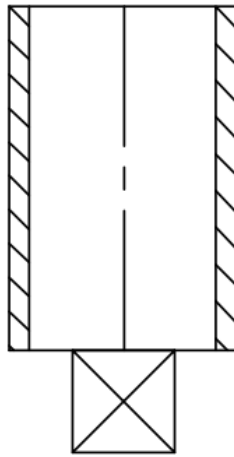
Cross-Sectional View of the Inlet Mechanism and Outlet Mechanism
